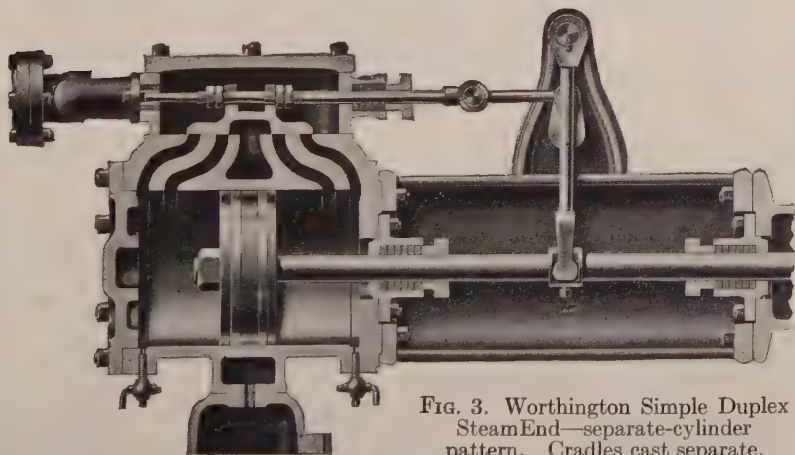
Worthington Simple Duplex Steam End—separate-cylinder pattern. Cradles cast separate.
